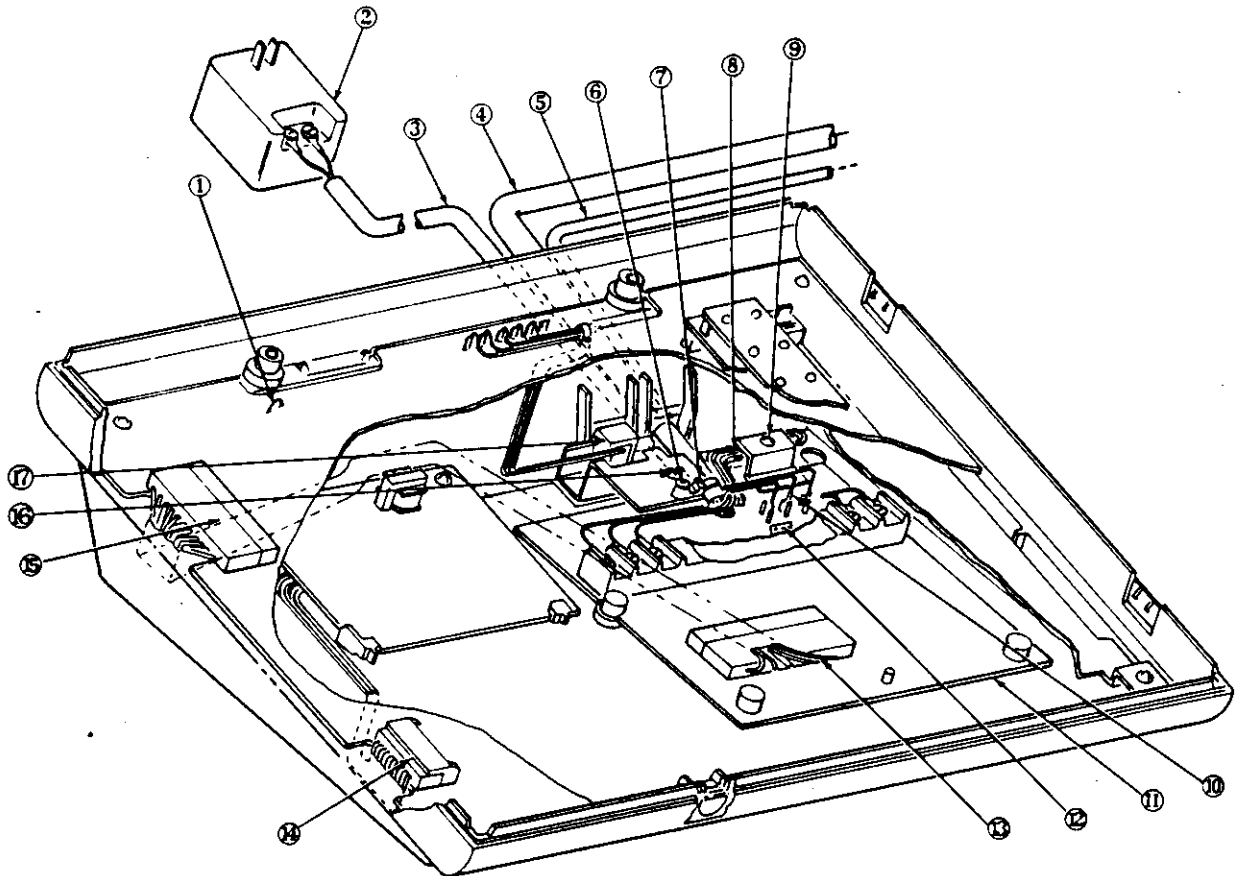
CUT AWAY VIEW OF EKT WITH ESIU PCB INSTALLED
